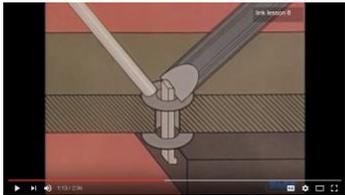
Basic Soldering for Electronics Lesson 7, "Integrated Circuits: The DIP-Type Package" produced by PACE, Inc. Viewed on Youtube.com
